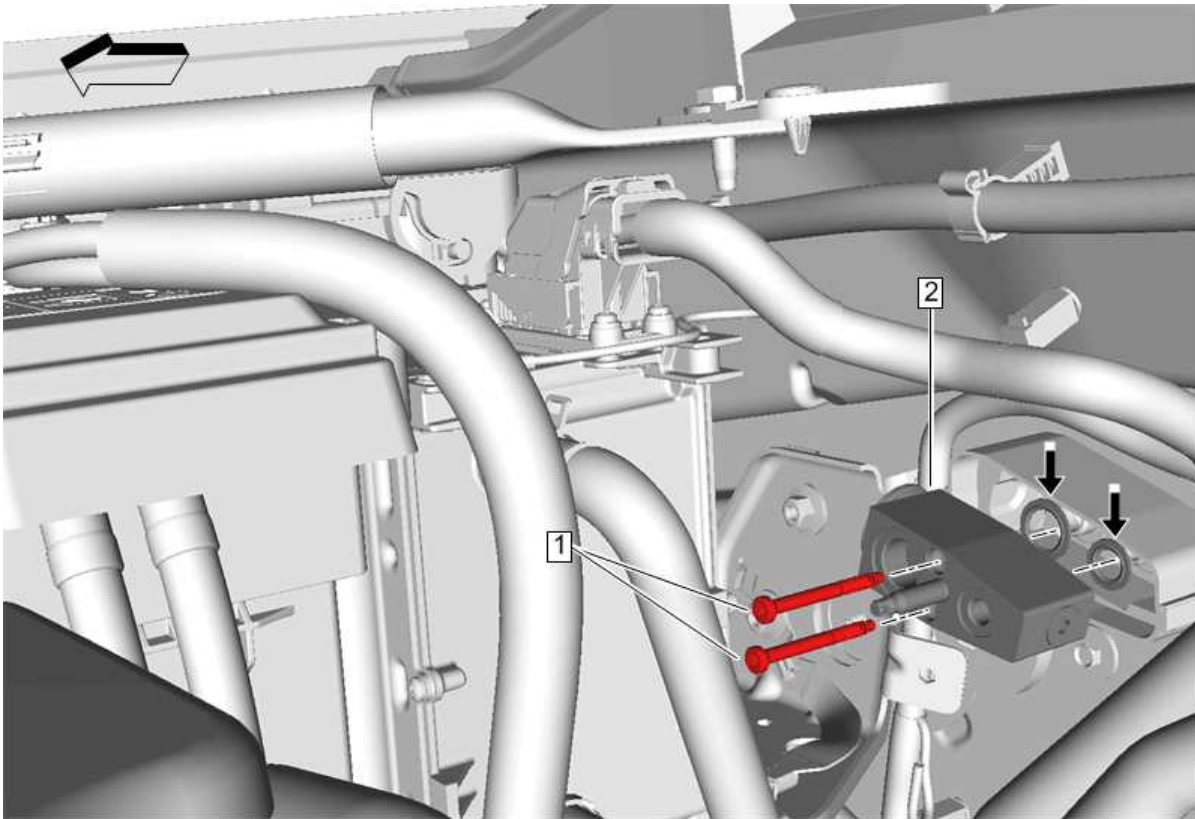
Air Conditioning Evaporator Thermal Expansion Valve
